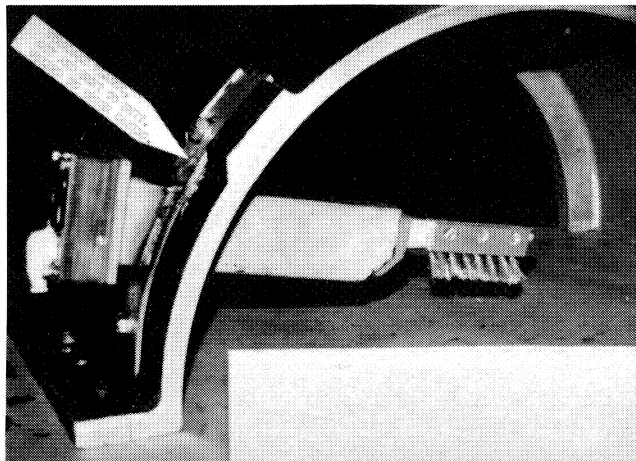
Typical Toothbrush Type Installation. Type *g* in coupling housing, to ride on shaft inboard of coupling hub.
